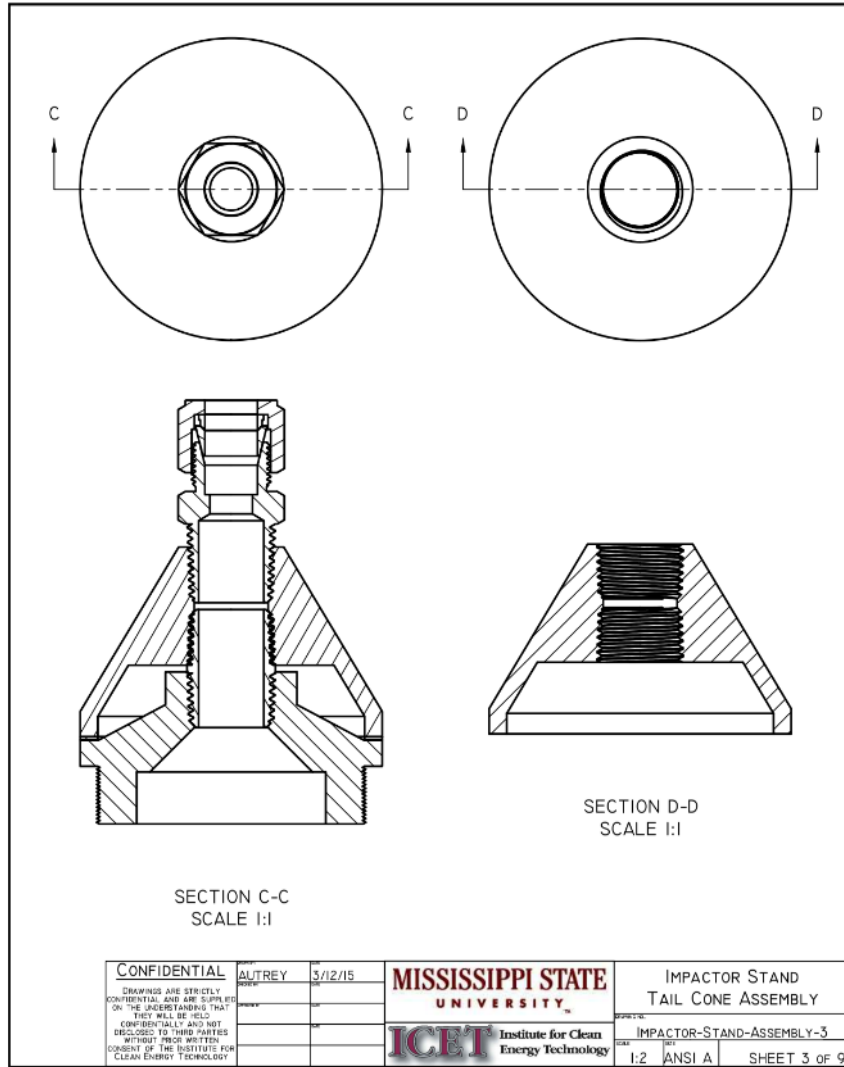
CAD drawing of the Pilat impactor tail cone assembly.
